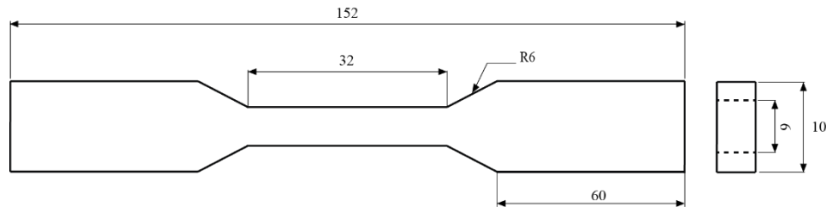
ASTM E8 Standard Tensile Test Sample Size Dimensions
